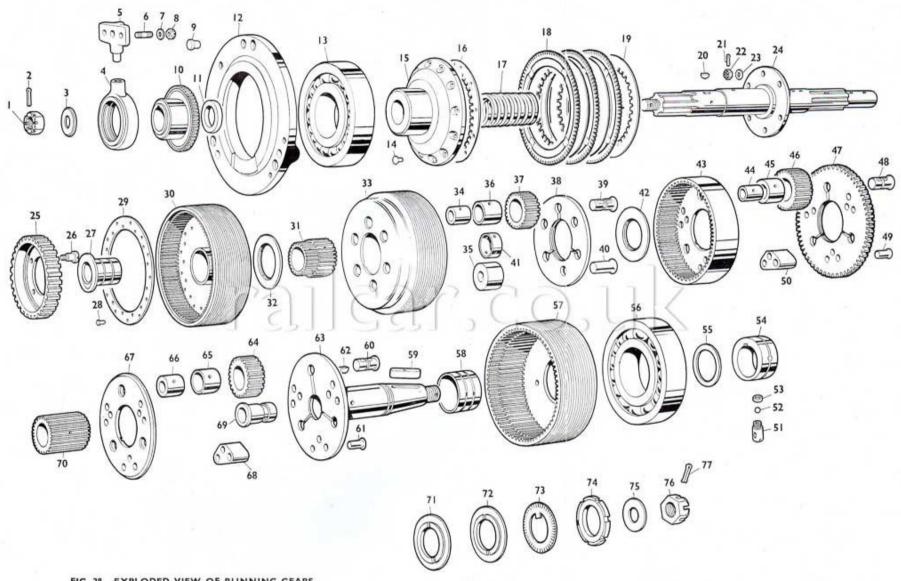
EXPLODED VIEW OF RUNNING GEARS
